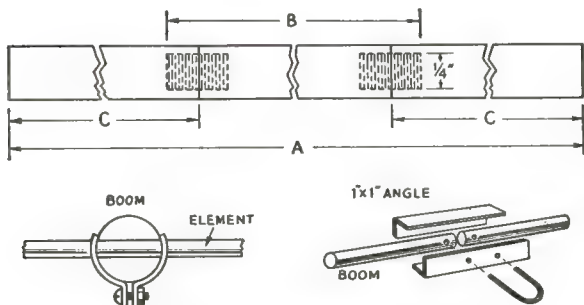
Details of the portable beam antenna for 6 and 2 meters. In the upper drawing, dimension B is the basic 144-Mc. element length which includes the 1/4-inch threaded studs. C indicates the extensions added at each end of the 144-Mc. elements for 50-Mc. operation. Lengths for B and C are given in the accompanying table.
